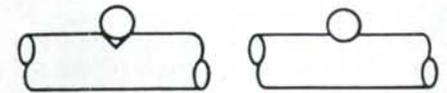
Shift rod grooves must have straight 60° sides and allow a small clearance under detent balls.
